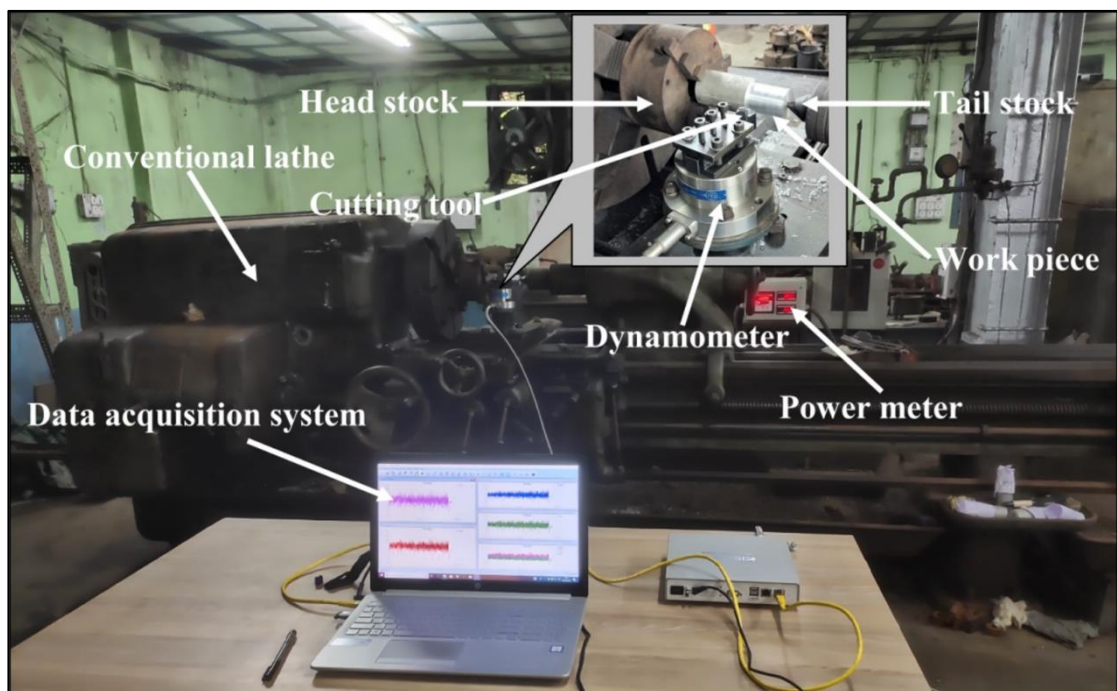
Photograph of experimental setup (inset: shows zoomed image of tool workpiece interface indicating dynamometer)
